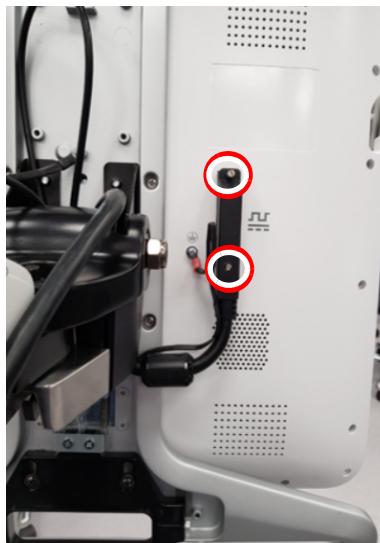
Connecting the MPB to Cockpit Cable to Cockpit
